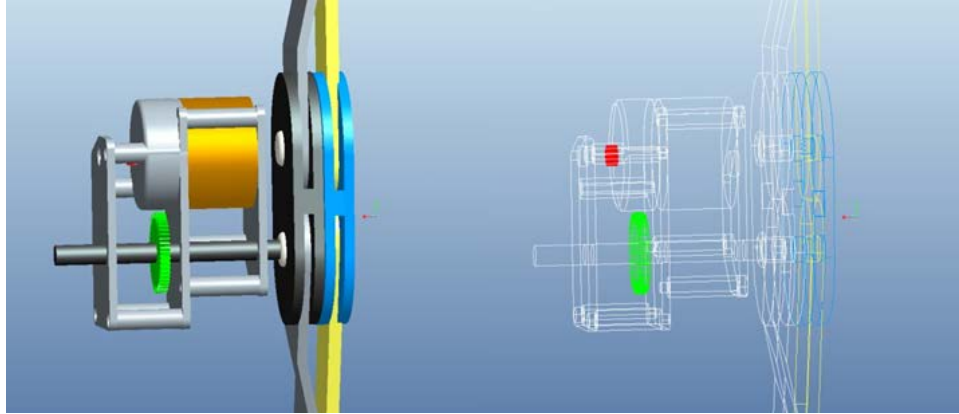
Pro/Engineer Transmission Close-up 3D Solid Model & Wireframe Views
